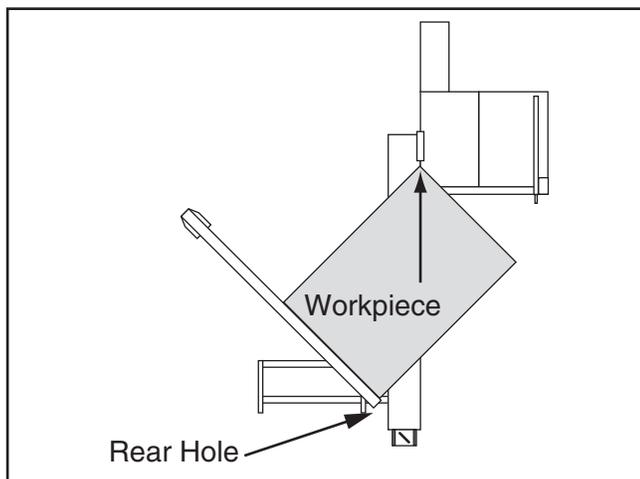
Crosscut fence mounted in rear hole for miter cuts from 0° to 45°.
